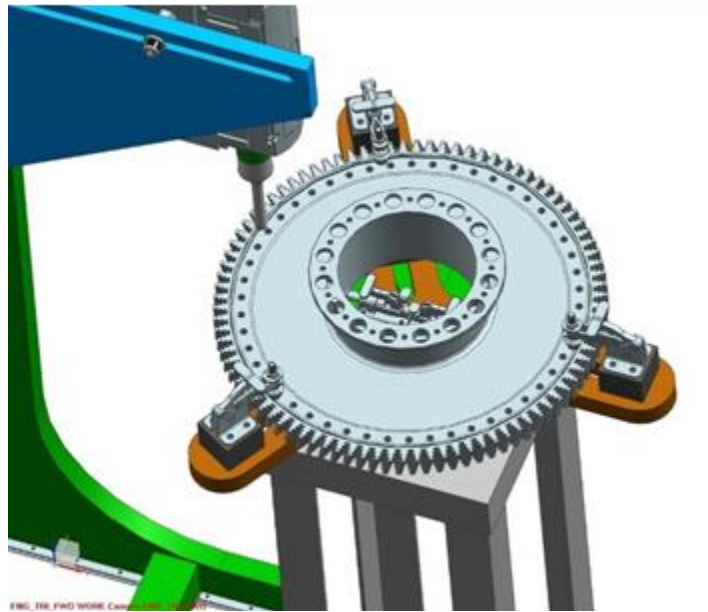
DISK SIR INSPECTION TABLE CONCEPT
